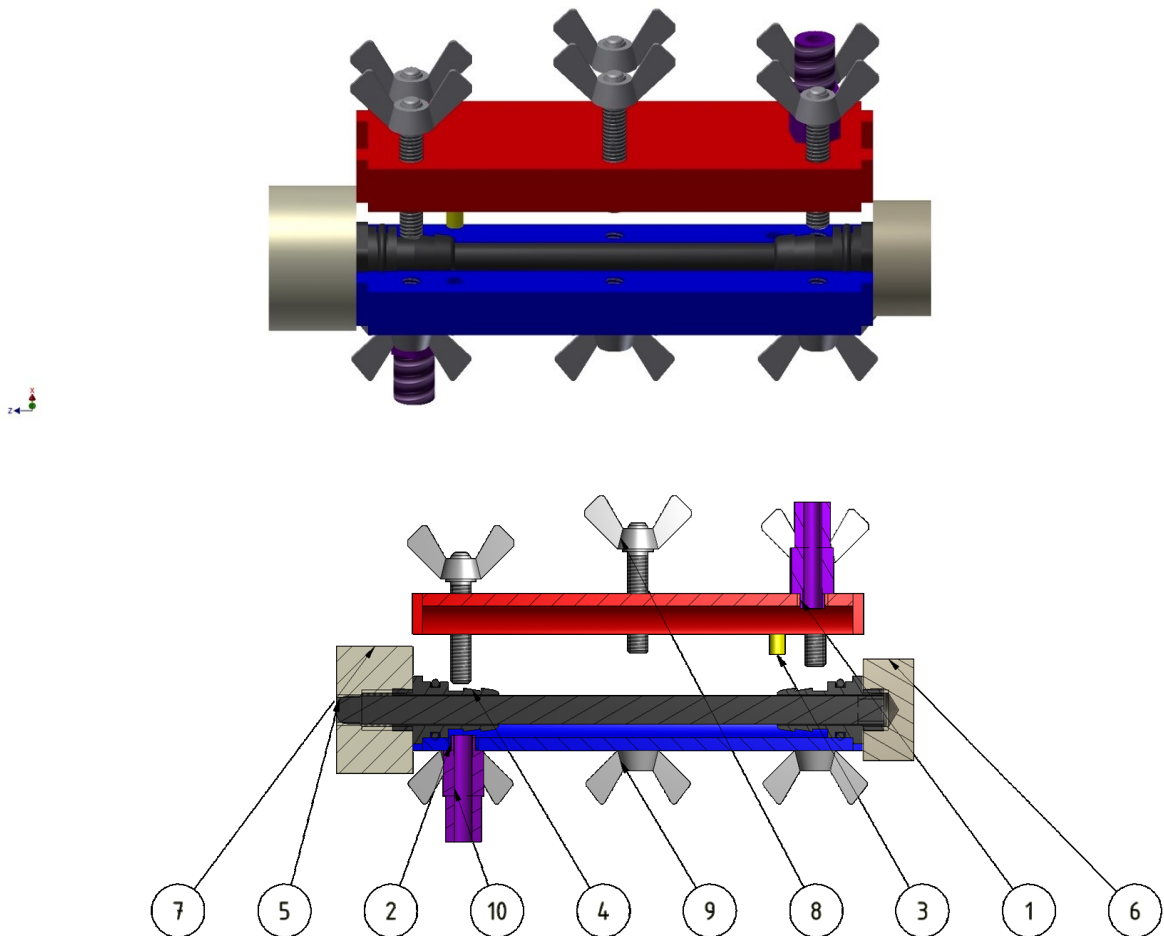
Fibrin casting mould consisting of: top (1), bottom (2), pins for positioning (3), fittings (4), central rod (5), front cap (6), end cap (7), wing bolts/nuts (8)/(9) and LUER adapters (10).^[6]
